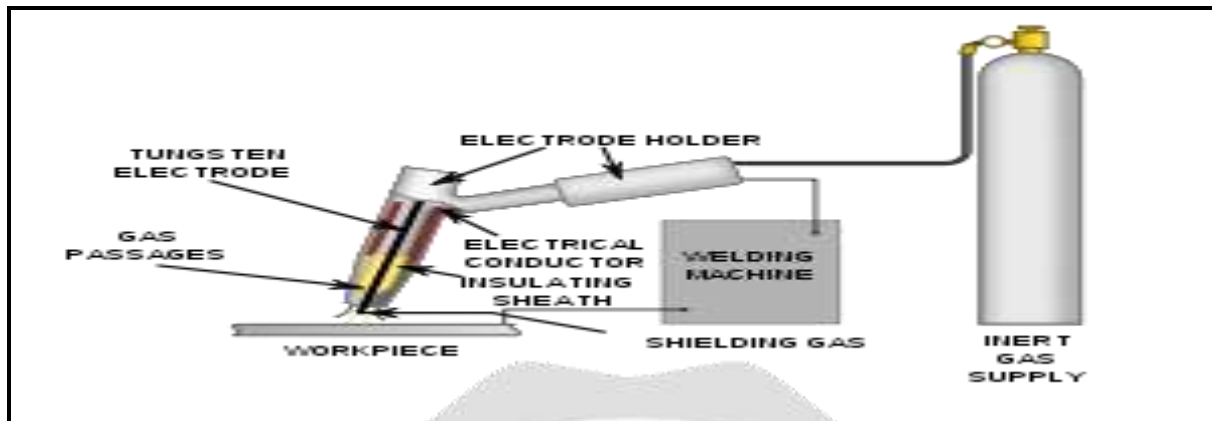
Schematic Diagram of TIG Welding Process [14]
